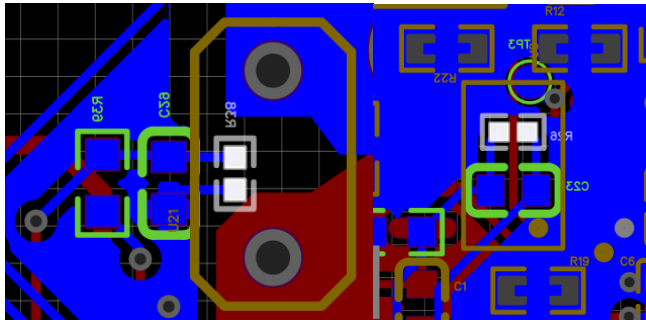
Examples of NTC thermistors placing under critical parts of the PCB
